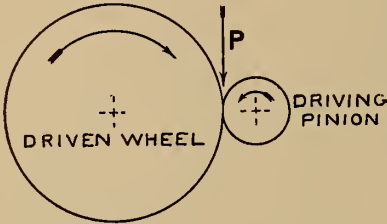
ARRANGEMENT OF TURBINE GEARING
